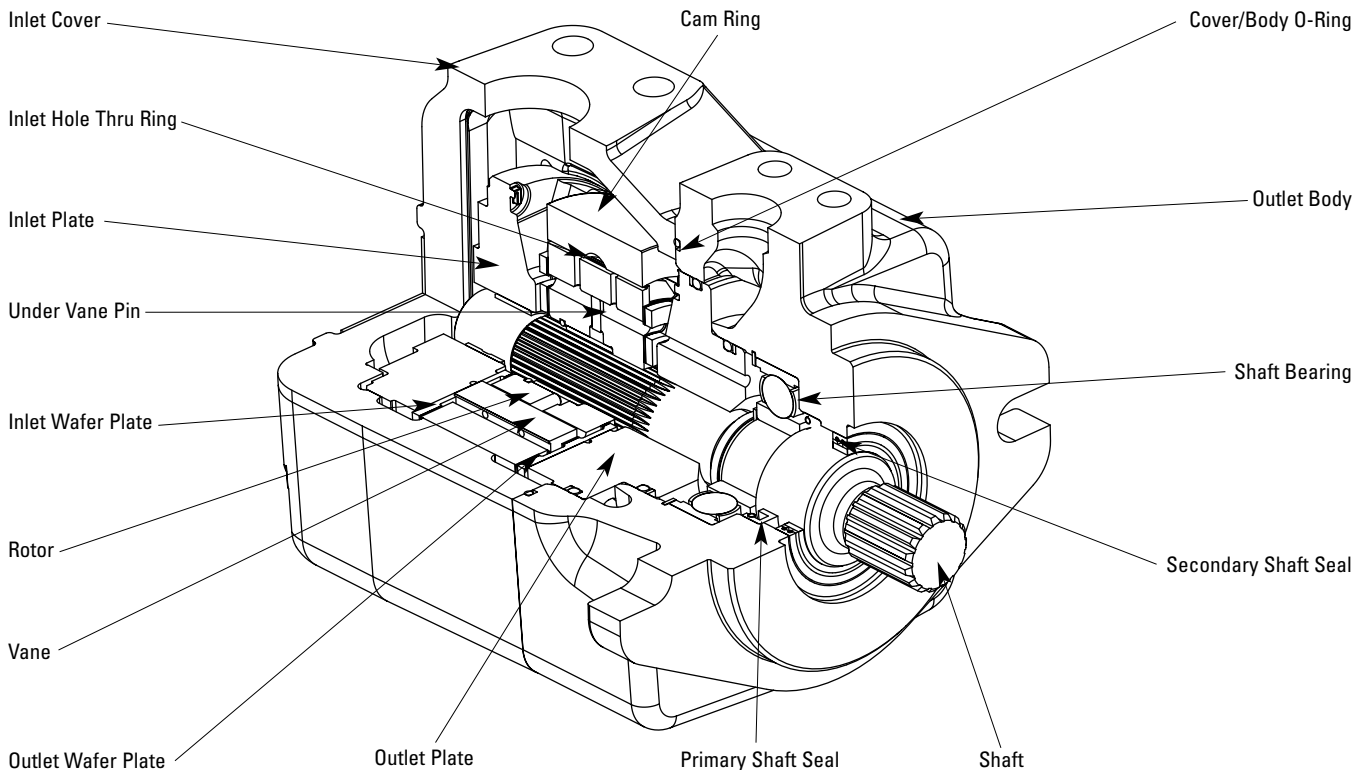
Cutaway View of Typical High Performance VMQ Single Vane Pump
